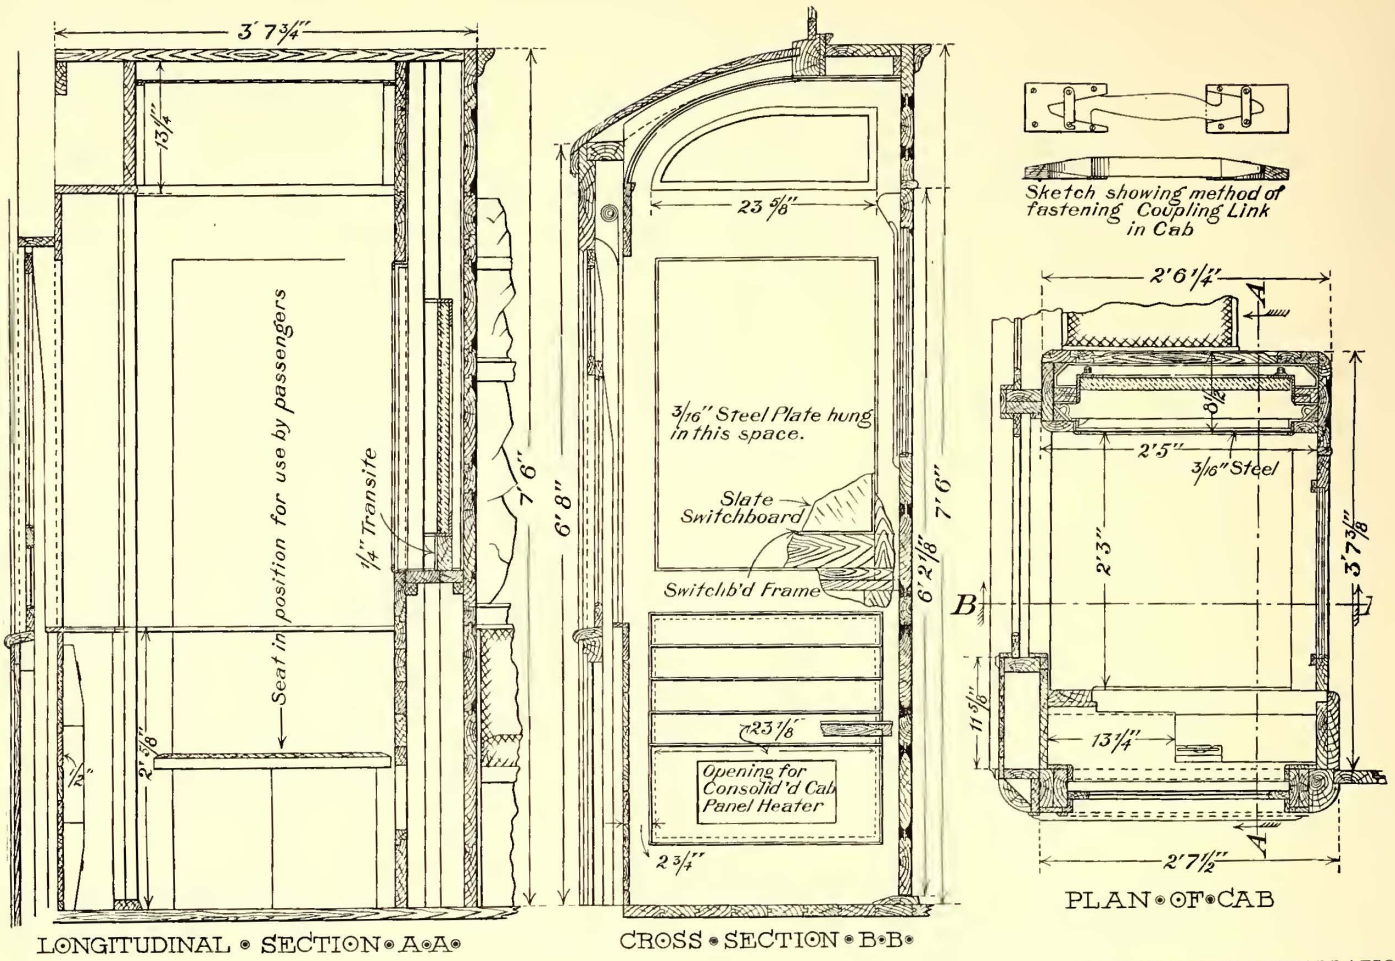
DETAILS OF THE SPECIAL CONSTRUCTION OF AND THE ARRANGEMENT OF SWITCHING APPARATUS AND FUSES UPON THE NEW CAB SWITCHBOARD
